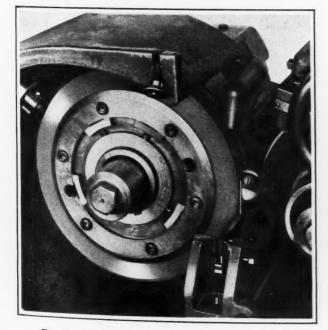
Set-up for Grinding Casein Pool Balls in a Centerless Machine
